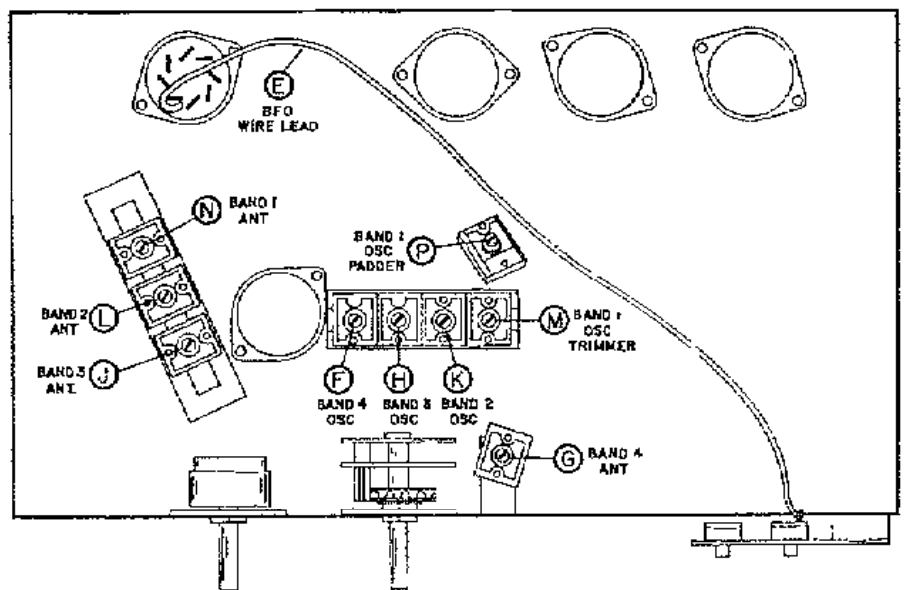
Bottom View of Chassis Showing Location of Alignment Adjustments
